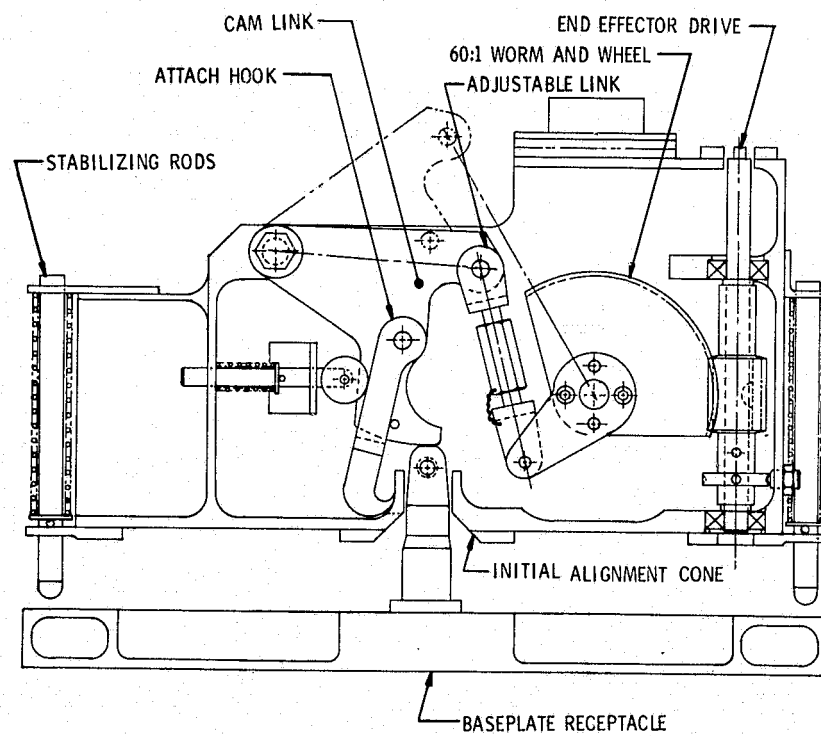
Baseplate Mechanism Details - Bottom Mounting
